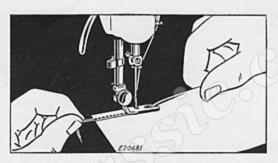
Hemming Edge of Material and Pulling Back Threads While Sewing
